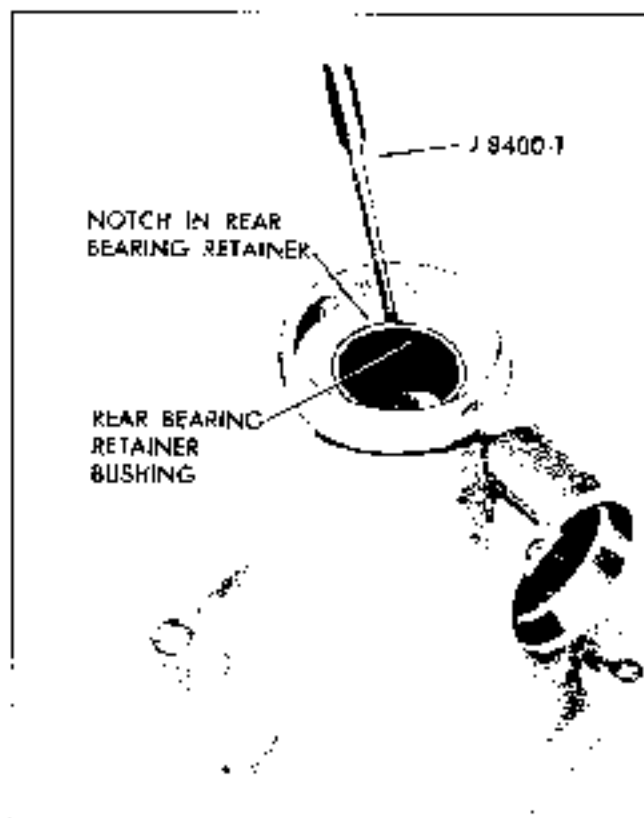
F-9 Removing Rear Bearing Retainer Bushing
